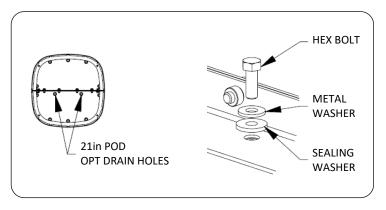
DRAIN HOLE LOCATIONS, PLAN VIEW
